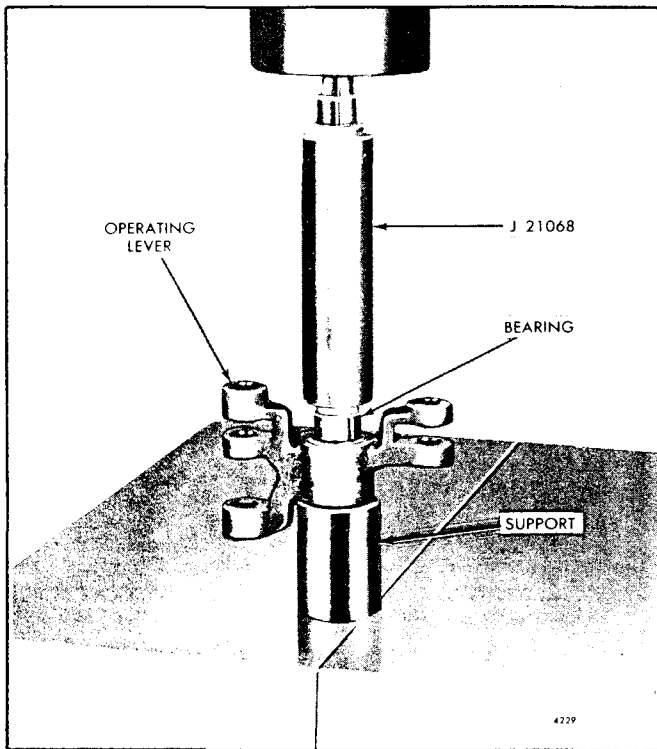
Installing Control Link Operating Lever Bearings in Lever
